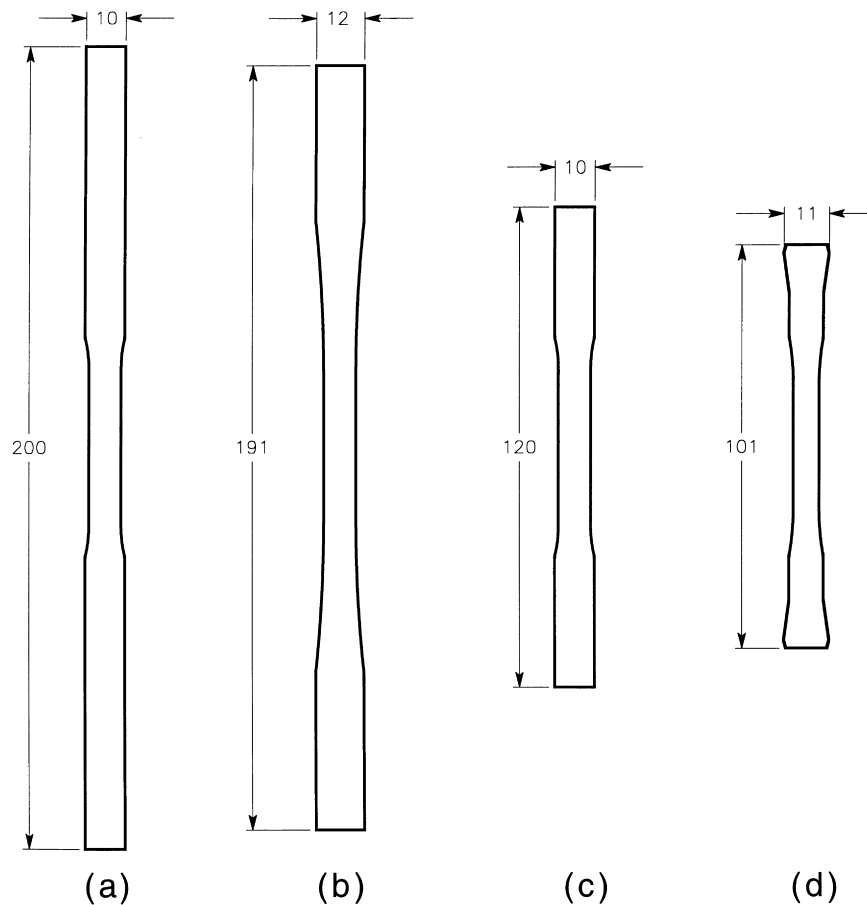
Examples of tensile specimen geometries recommended in ASTM C1275: (a–c) face-loaded specimens; (d) shoulder-loaded specimen. Typical dimensions in mm.
